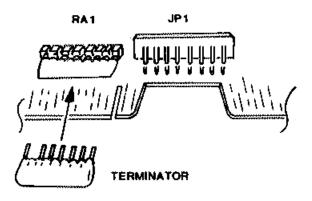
INSTALLATION OF TERMINATOR-DE-35 BOARD
